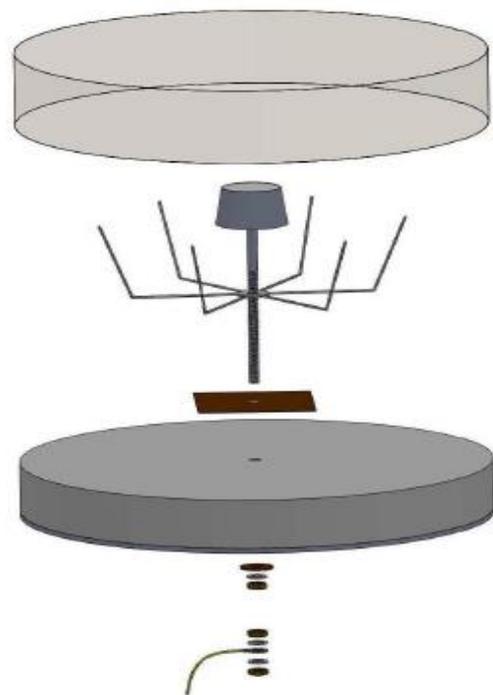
Typical diffuser installed in the center of the IF base (exploded view)
